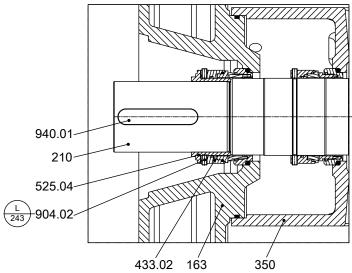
Drawing of impeller-end mechanical seal for motors 320 6.N, 360 6.N, 400 6.N, 440 6.N
